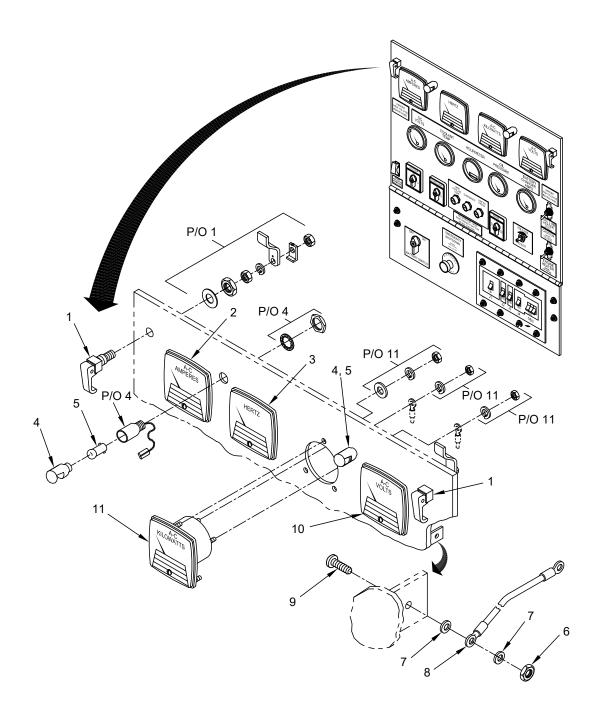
Control Panel Assembly (Sheet 1 of 4).
